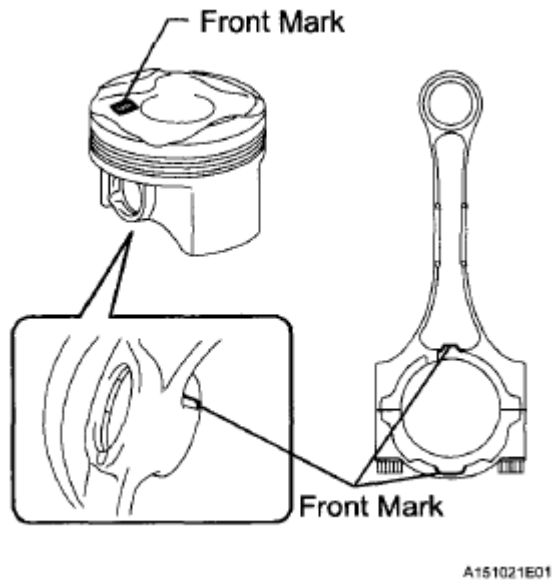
Identifying Piston And Connecting Rod Front Mark Location
